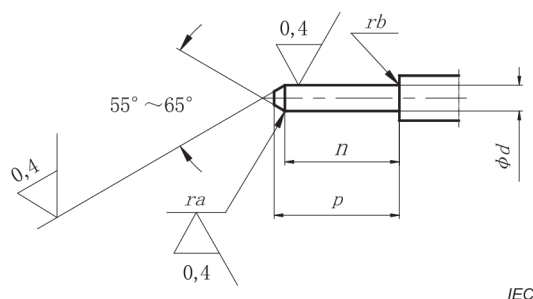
Gauge pin for socket centre contact (for dimensions, see Table 3)
